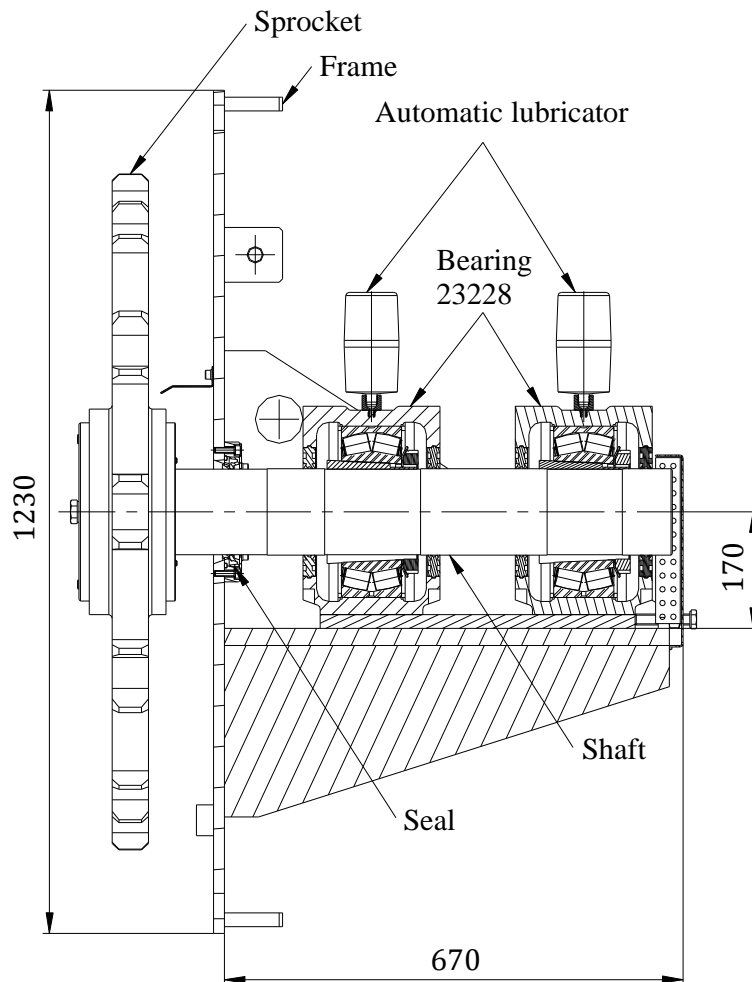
Current assembly of the sprocket and the sprocket shaft including the spherical roller bearings
